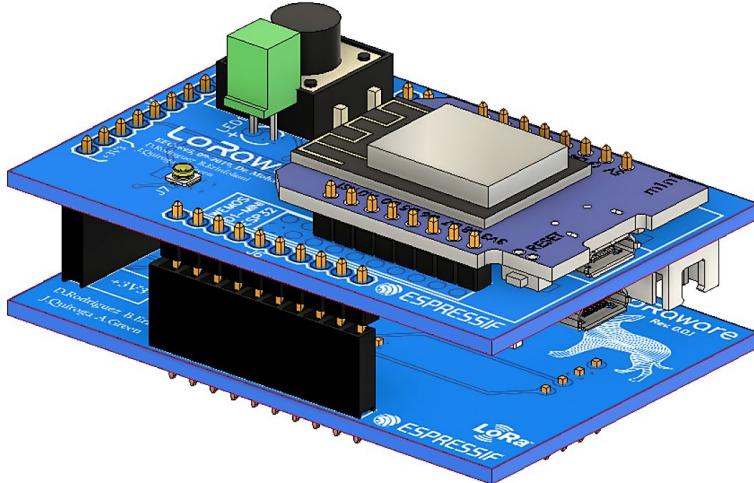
CAD Rendering of Completed Electrical Assembly for LoRaware Wireless Device
